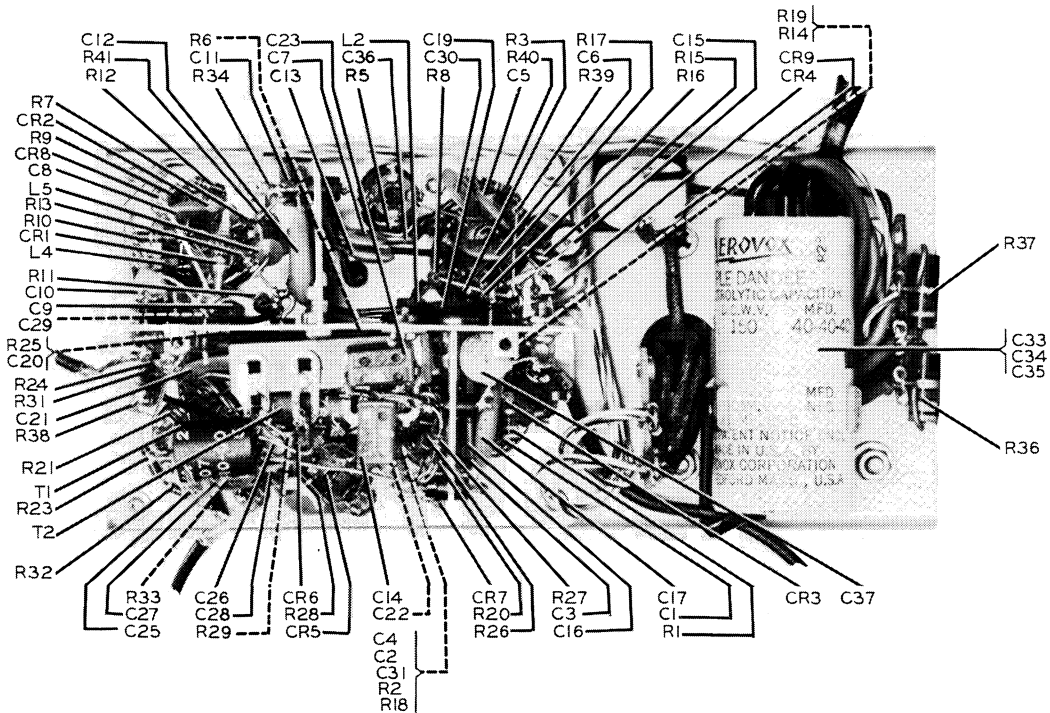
136C-1 Noise Blanker, Bottom View Showing Parts Location
